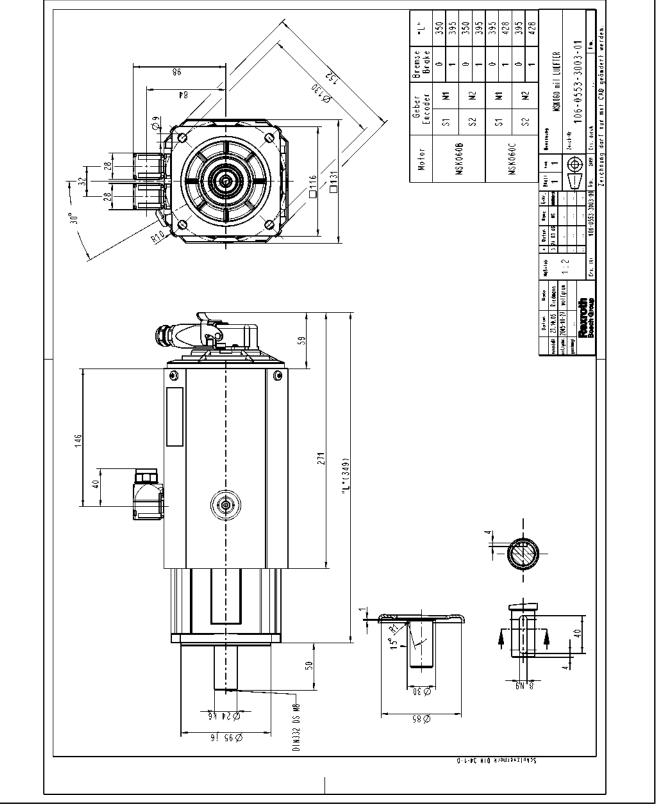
Dimension sheet MSK060 with axial fan unit
